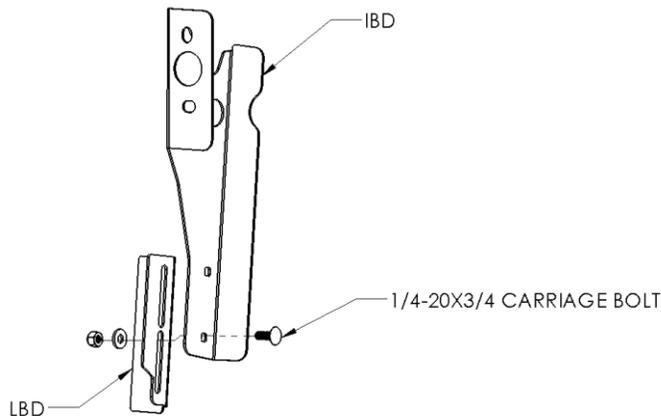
Inner bracket sub-assembly, driver side shown
